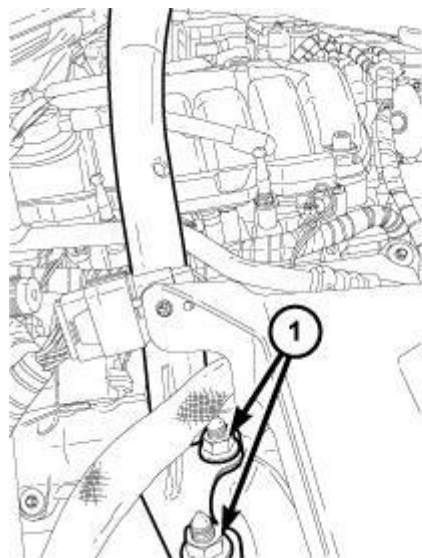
Rotating Strut Tower Support Beam Forward/Rearward To Remove/Install Beam
